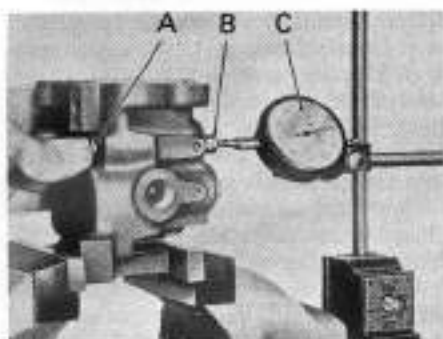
View showing dial indicator being used to adjust spool valve; refer to text for procedure.
